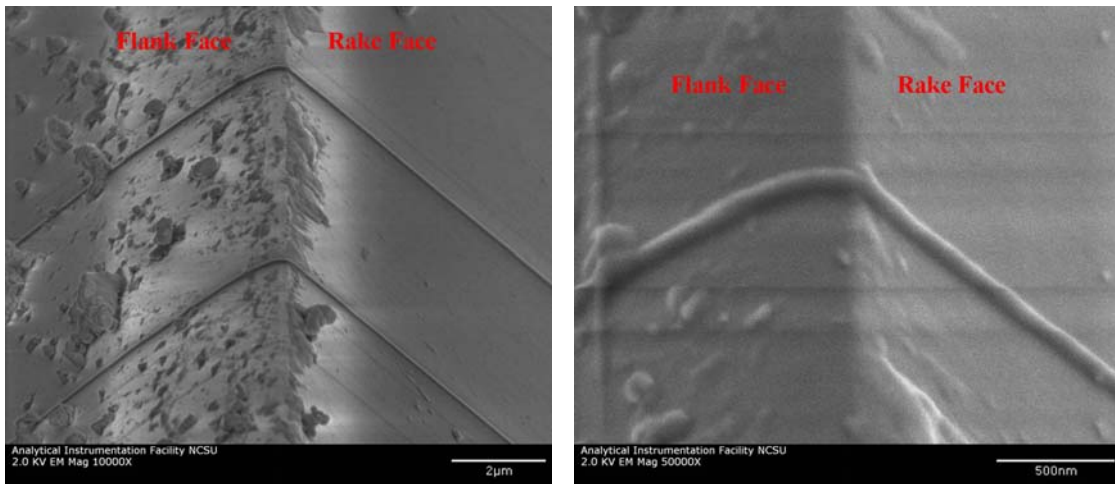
Cutting edge of worn diamond tool with straight nose for 6061 Al. In each image the flank face is on the left and the rake face is on the right.
